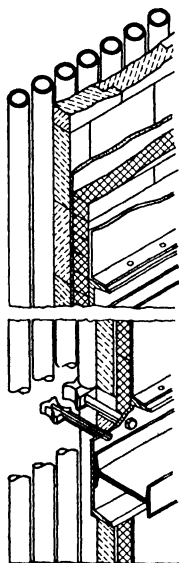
Water-wall of bare closely spaced tubes backed with insulation and steel casing. (Riley Stoker Corporation.)
